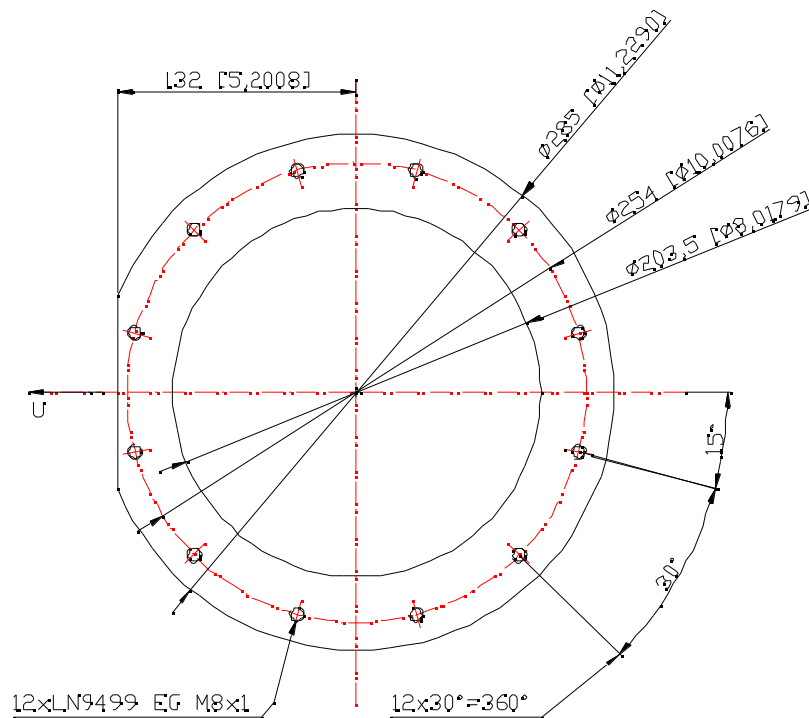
Accessport Bolt Pattern (12 threaded inserts with thread M8x1, 2D deep)
